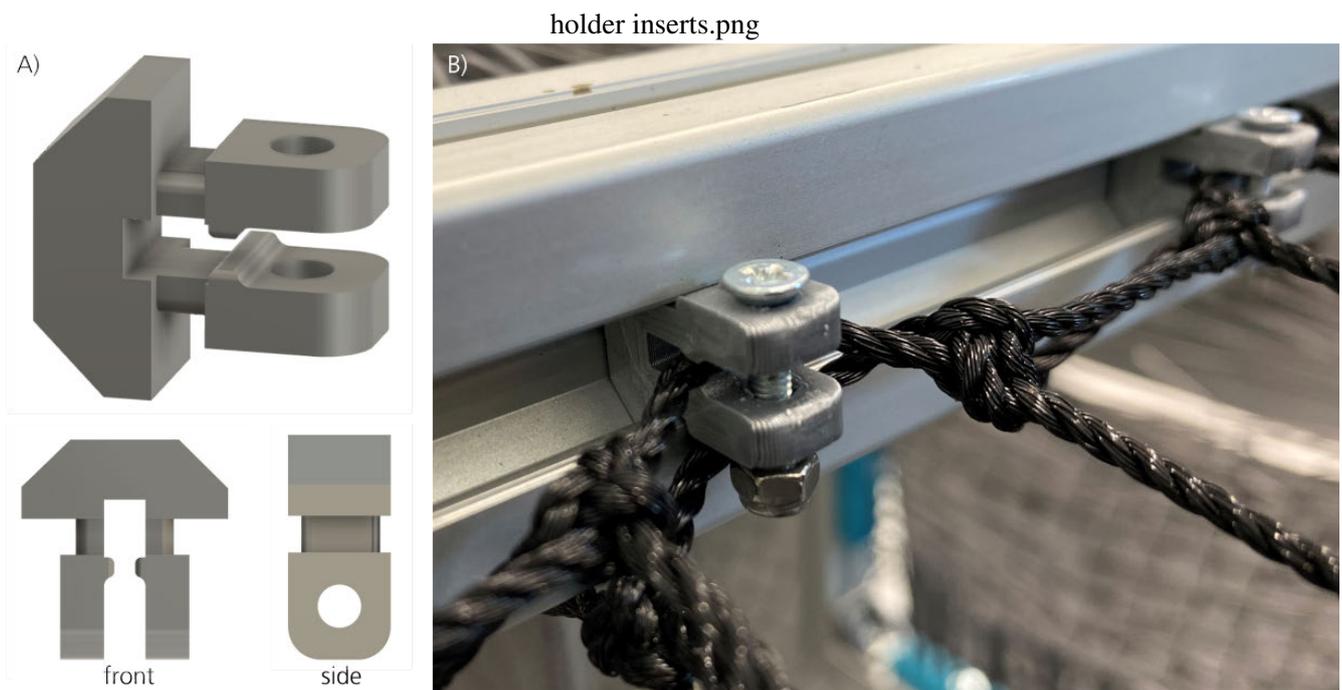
Net holder inserts. A) CAD drawing of the inserts, B) 3D-printed inserts holding the net inside the profile cavity.
